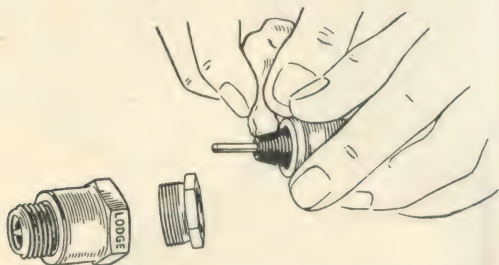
CLEANING DISMANTLED SPARKING PLUG
